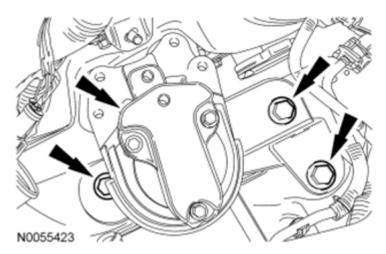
Locating Engine Mount Bolts Courtesy of FORD MOTOR CO.
